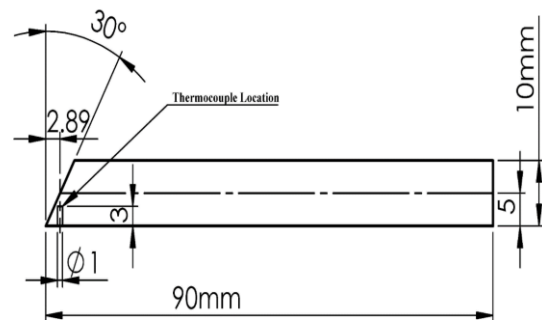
Schematic drawing of edge preparation showing thermocouple location.
